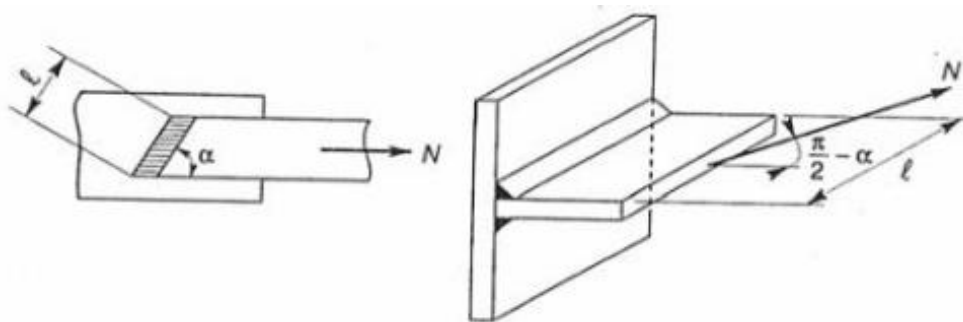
Assembly with Oblique Weld Beads
